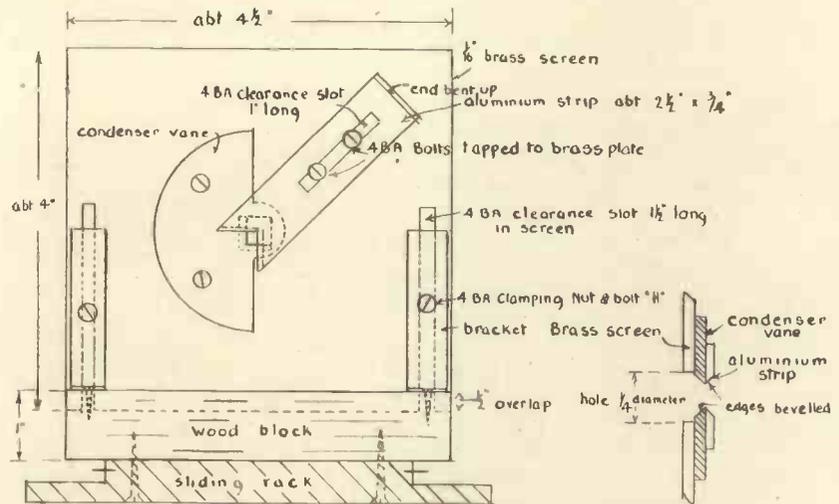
Details of mask. Fig. 5 (right).—Detail of aperture.
